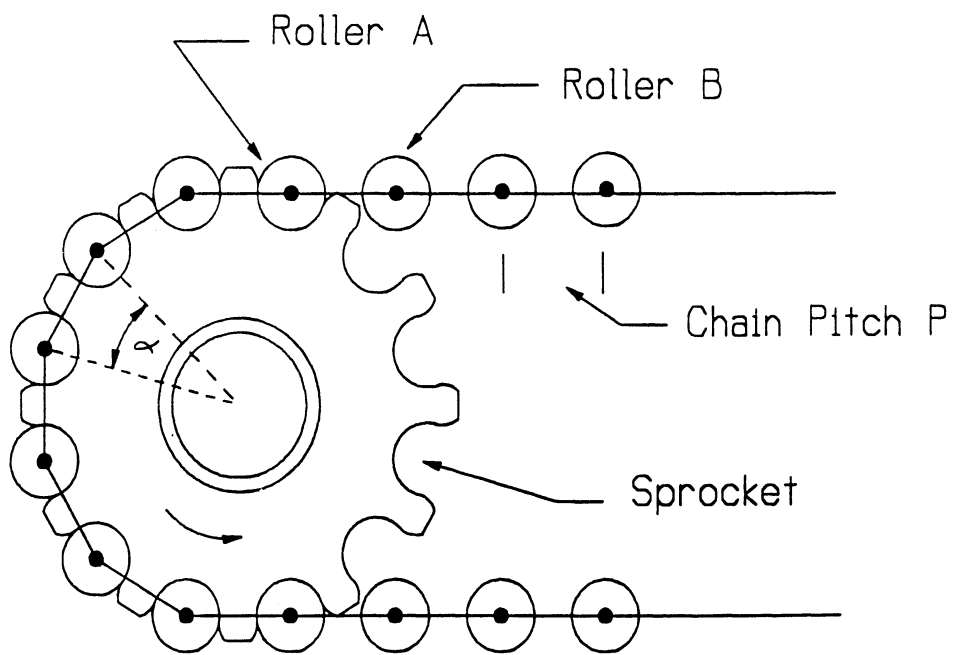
Roller B is about to seat, causing an impact force between roller B and the sprocket.
